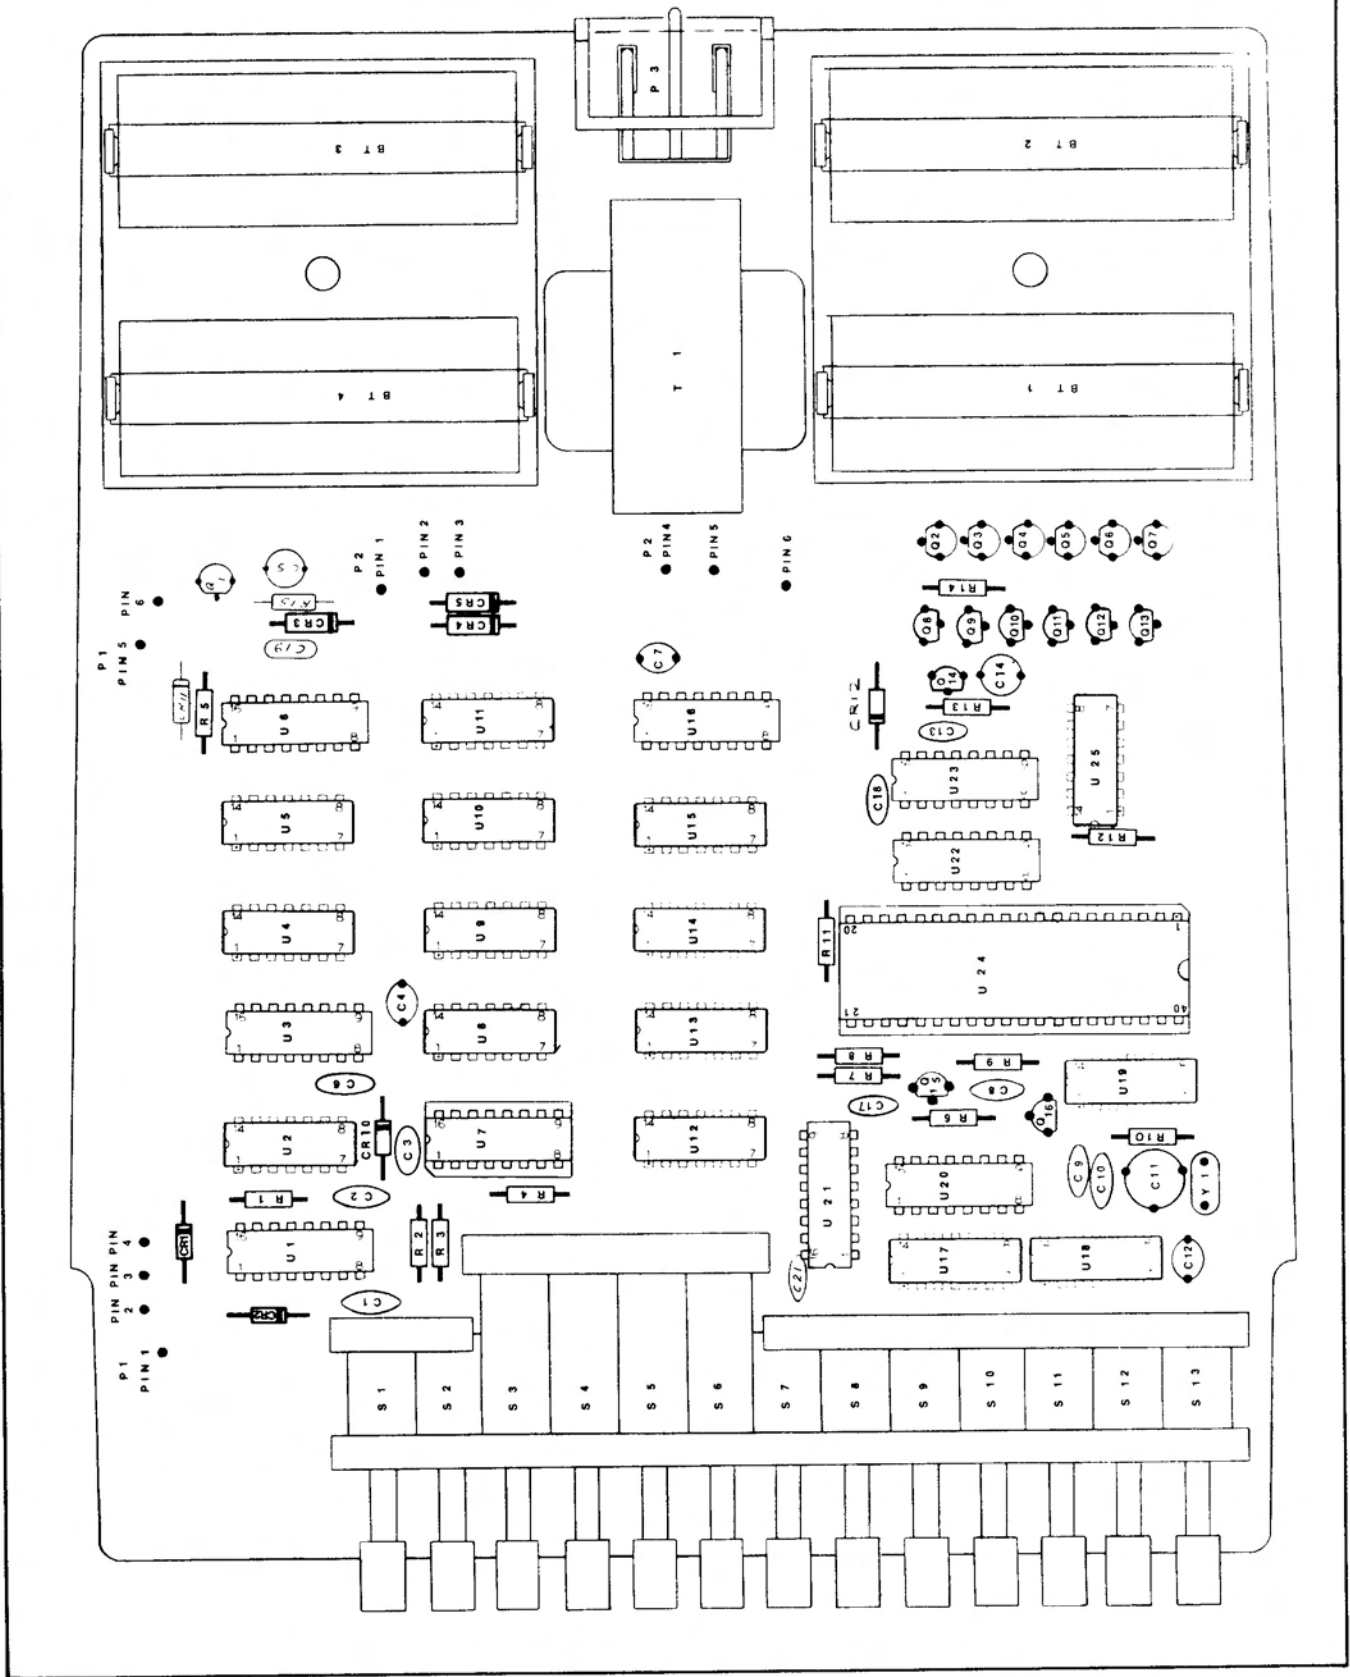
MAIN PCB ASSEMBLY - BATTERY (-01 OPTION) CONFIGURATION
